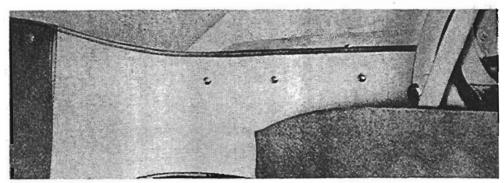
Remove the Three Screws at Both Ends of the Well Rear Trim Panel.
